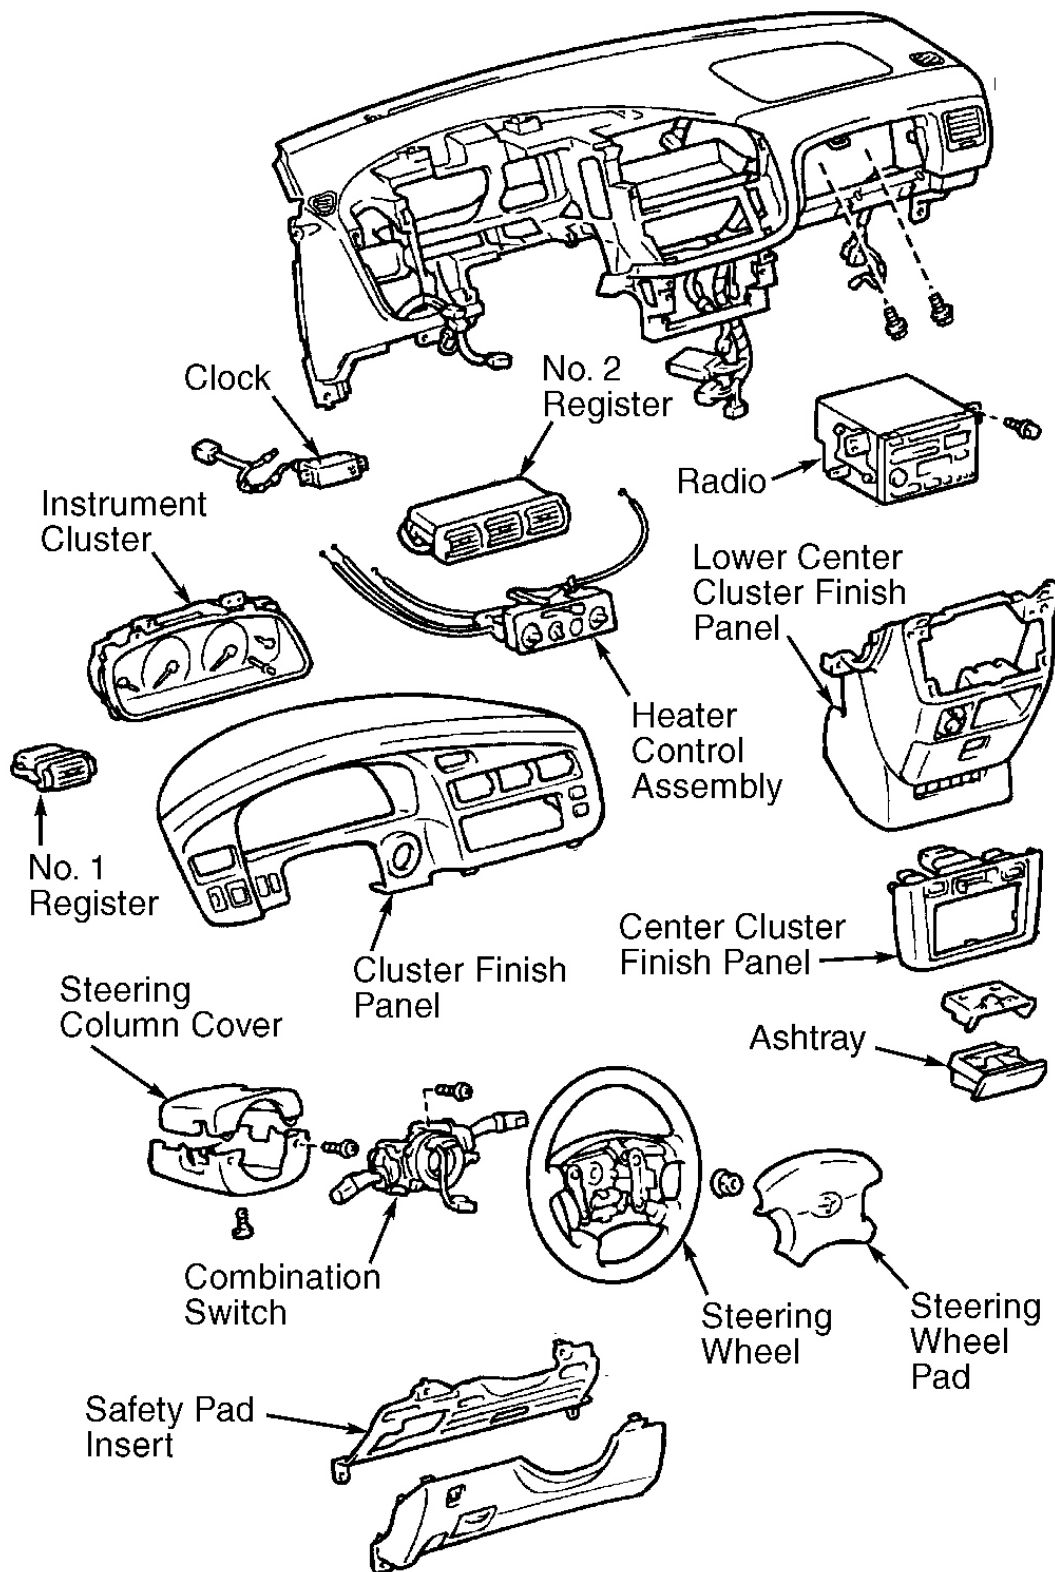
Removing Instrument Panel (Sienna)Courtesy of TOYOTA MOTOR SALES, U.S.A., INC.Removal & Installation (Tacoma)
